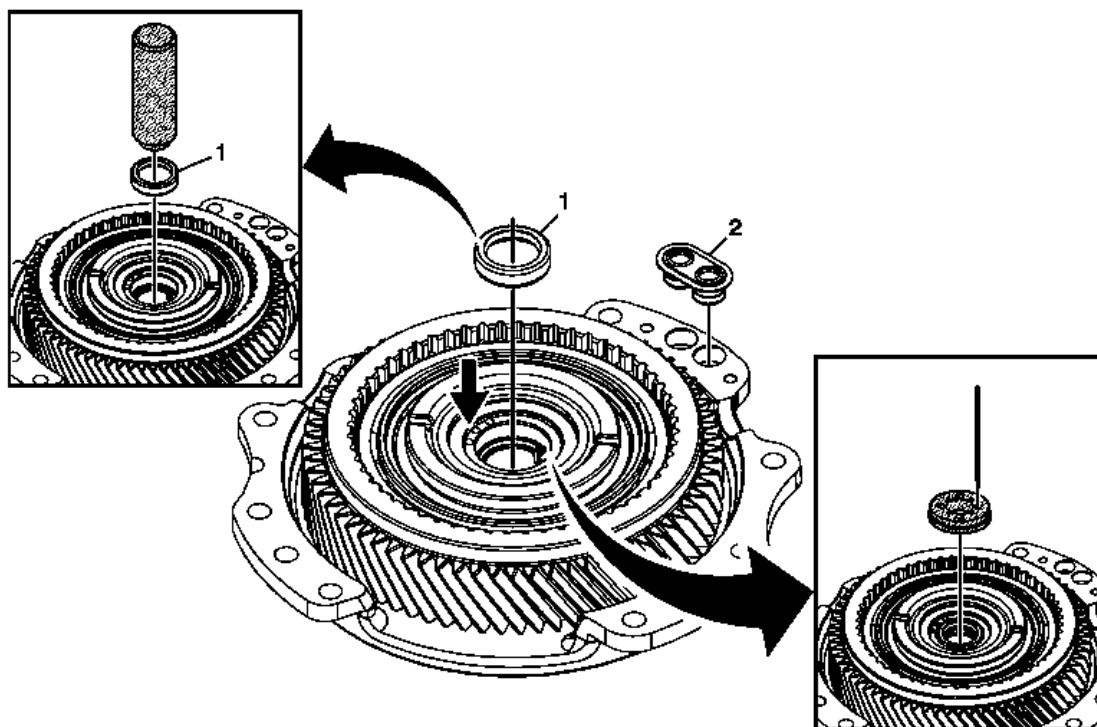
View Of Front Differential Transfer Drive Gear Support Seal
